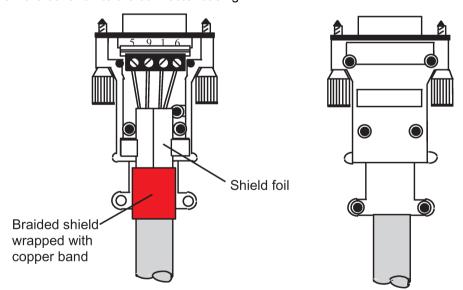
9-pin D-sub plug fitted to the standard cable
